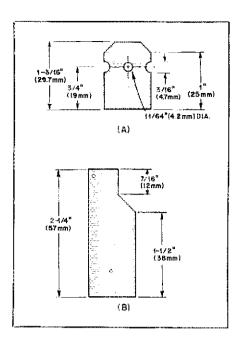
Templates for making the heat sinks for Q8 (at A) and Q9 (at B). The material is 3/32-inch (2 mm) thick aluminum. The heat sinks are attached to the circuit board with no. 2.56 fasteners.
